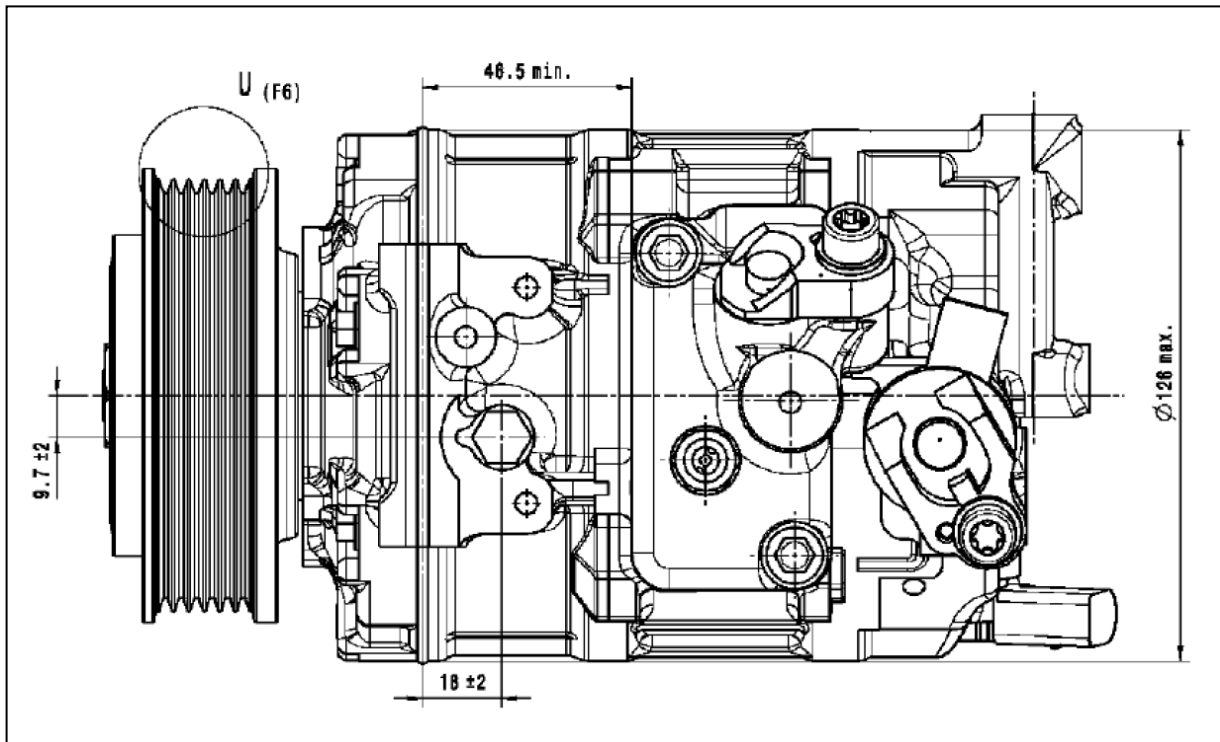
Dimensions of air conditioner compressor Denso 7SU17 (7E0.820.803) (plan view)
